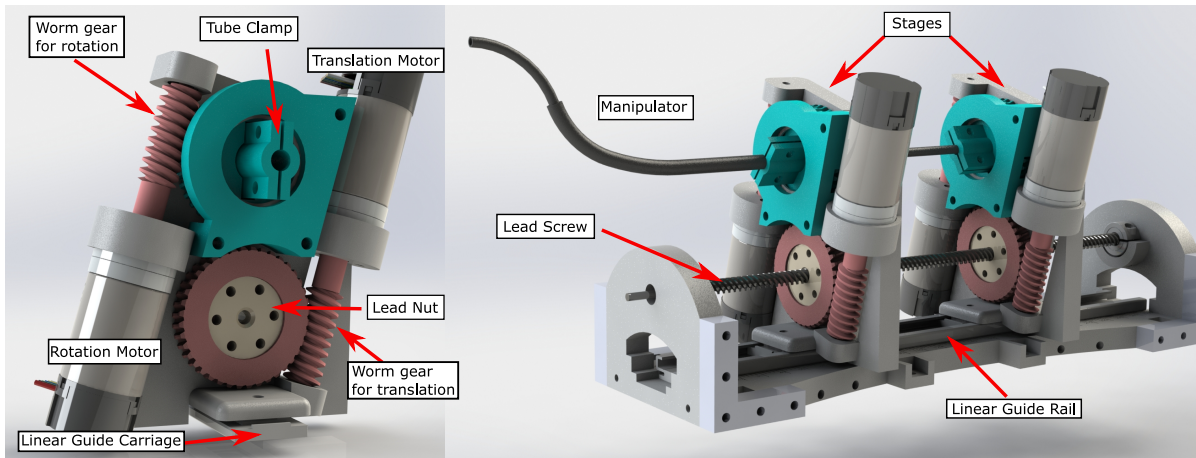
(Left) Each stage in the prototype robot is separate from the others and can completely actuate a tube. The lead nut spins to translate along the lead screw and the tube is clamped to the rotation worm gear. (Right) A rendered model of the full robot with two stages. Each stage translates using the main lead screw and rides along the linear guide rail.
